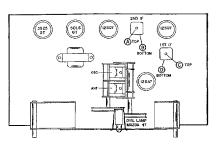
Top View of Chassis Showing Location of Alignment Adjustments, Tubes and Dial Lamp
